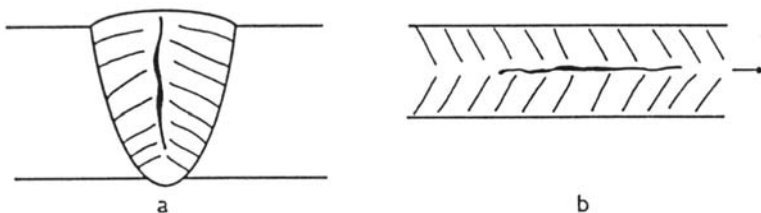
Schematic representation of a centreline crack in weld metal: a) transverse cross-section, b) top view.
